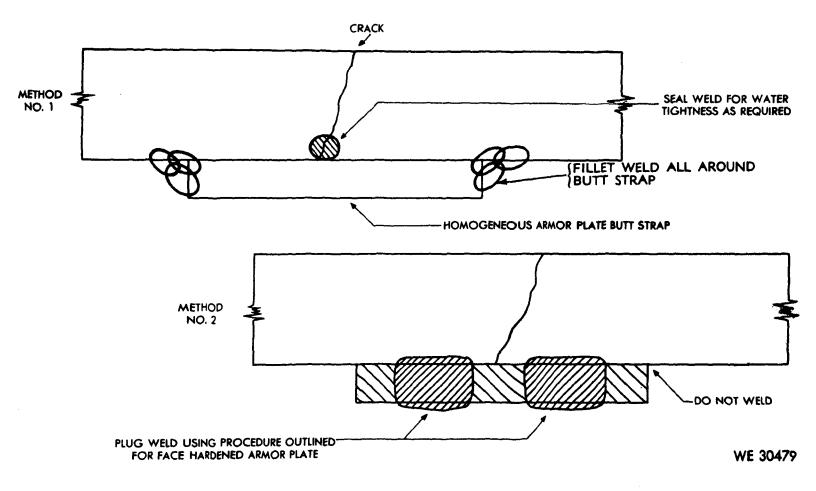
Butt strap welds on cracked armor plate.
